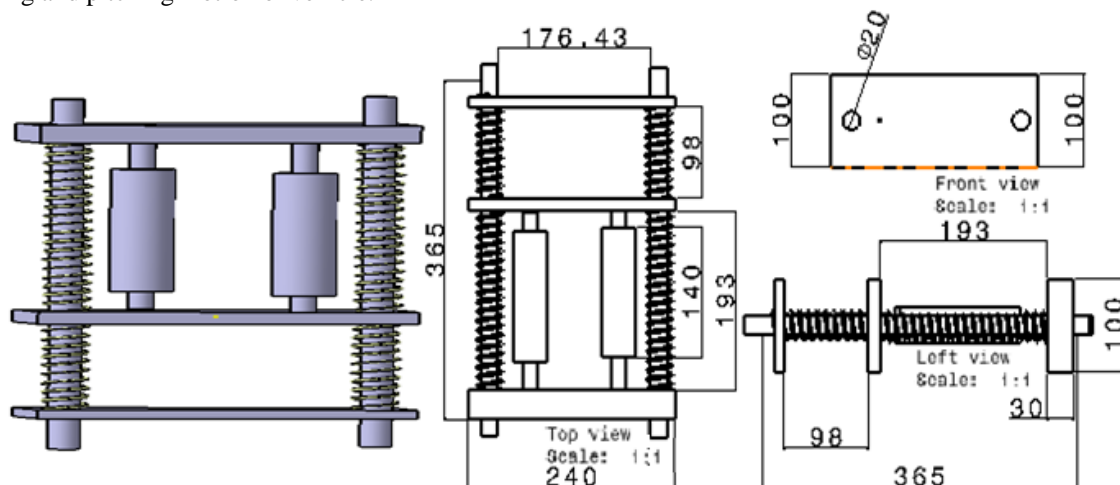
Design of Test rig assembly 2-D view and Test rig assembly dimension in draft view.
